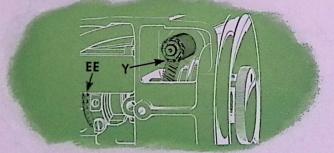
Lubricating Points for Spiral Gears in Top of Machine
